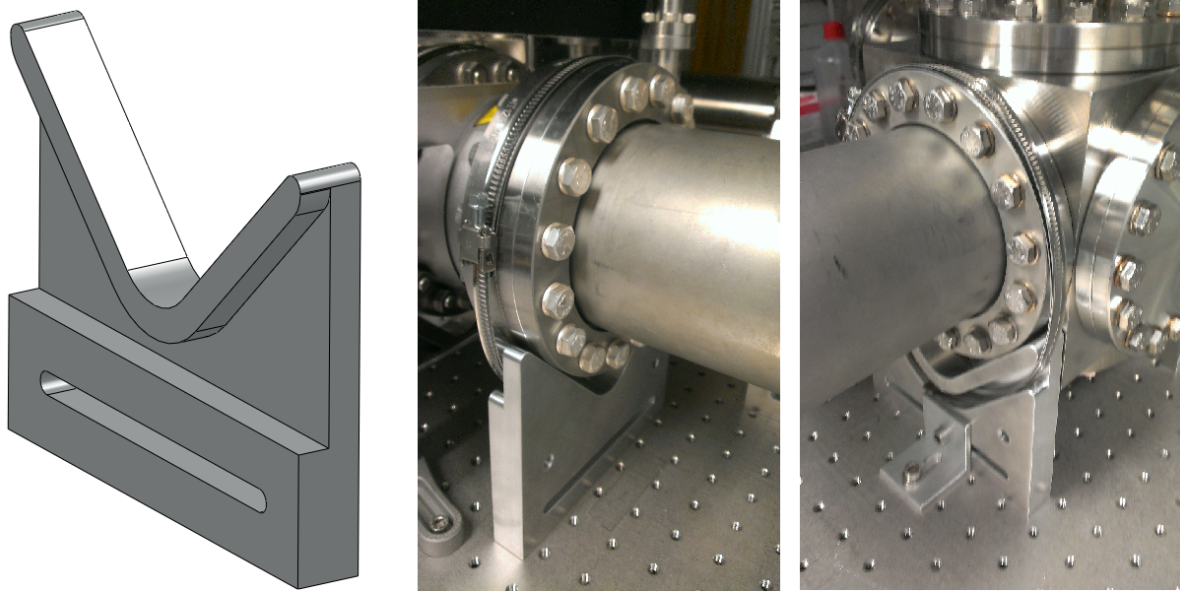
Vacuum mounting part in Solidworks and used in reality.
